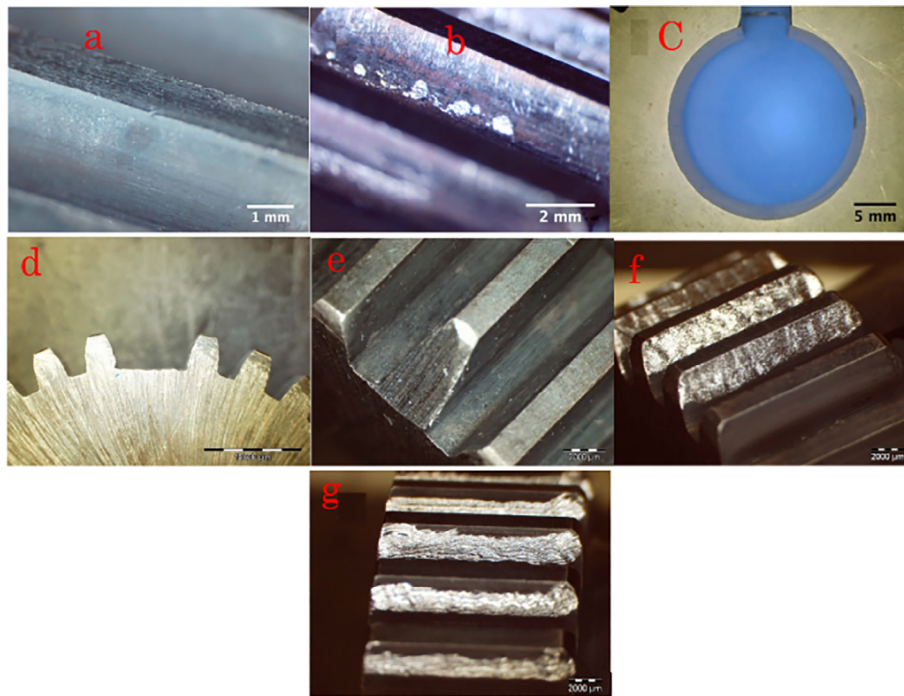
Images representative of the health condition of the gears used in this experiment (a) healthy gear. (b) gear with pitting. (c) gear with eccentricity (d) missing tooth. (e) chipped tooth. (f) abrasion at tooth of gear (low severity). (g) abrasion at tooth of gear (high severity).
